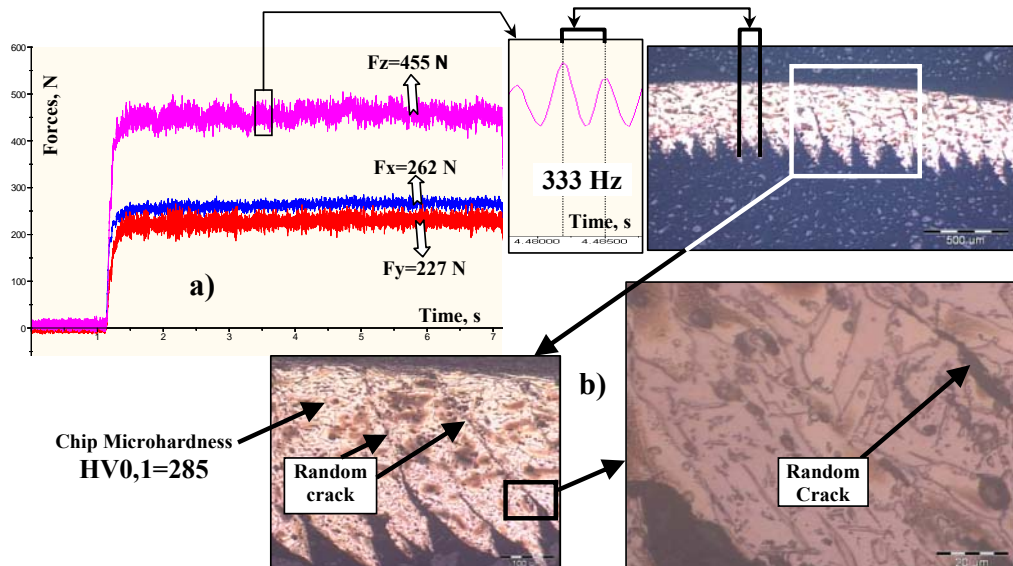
Cutting forces measuring results and chip shape exploration (machining without the use of metalworking fluid)
